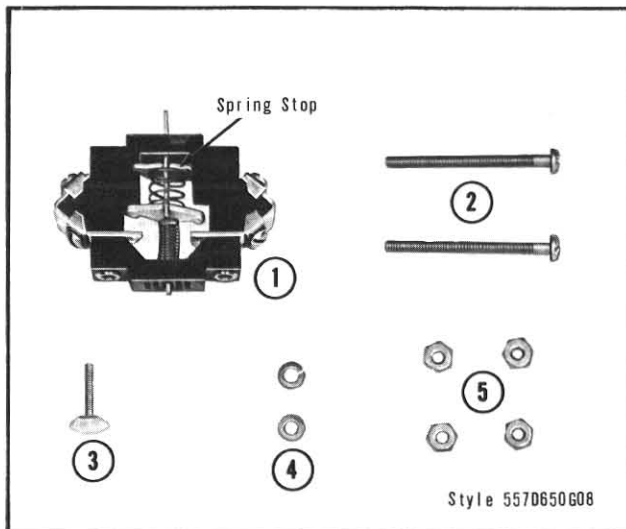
Component Parts of Type L-60, Electrical Interlock Kits.
